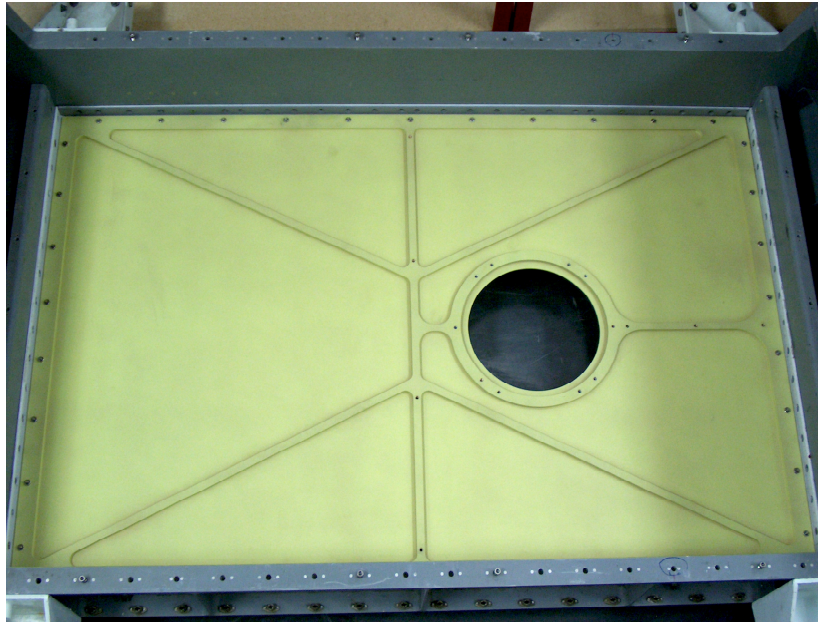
CPL pallet floor. A 10-inch diameter optical window will be placed in the open area. The floor is not load-bearing, as the CPL instrument mounts only to the pallet walls.
